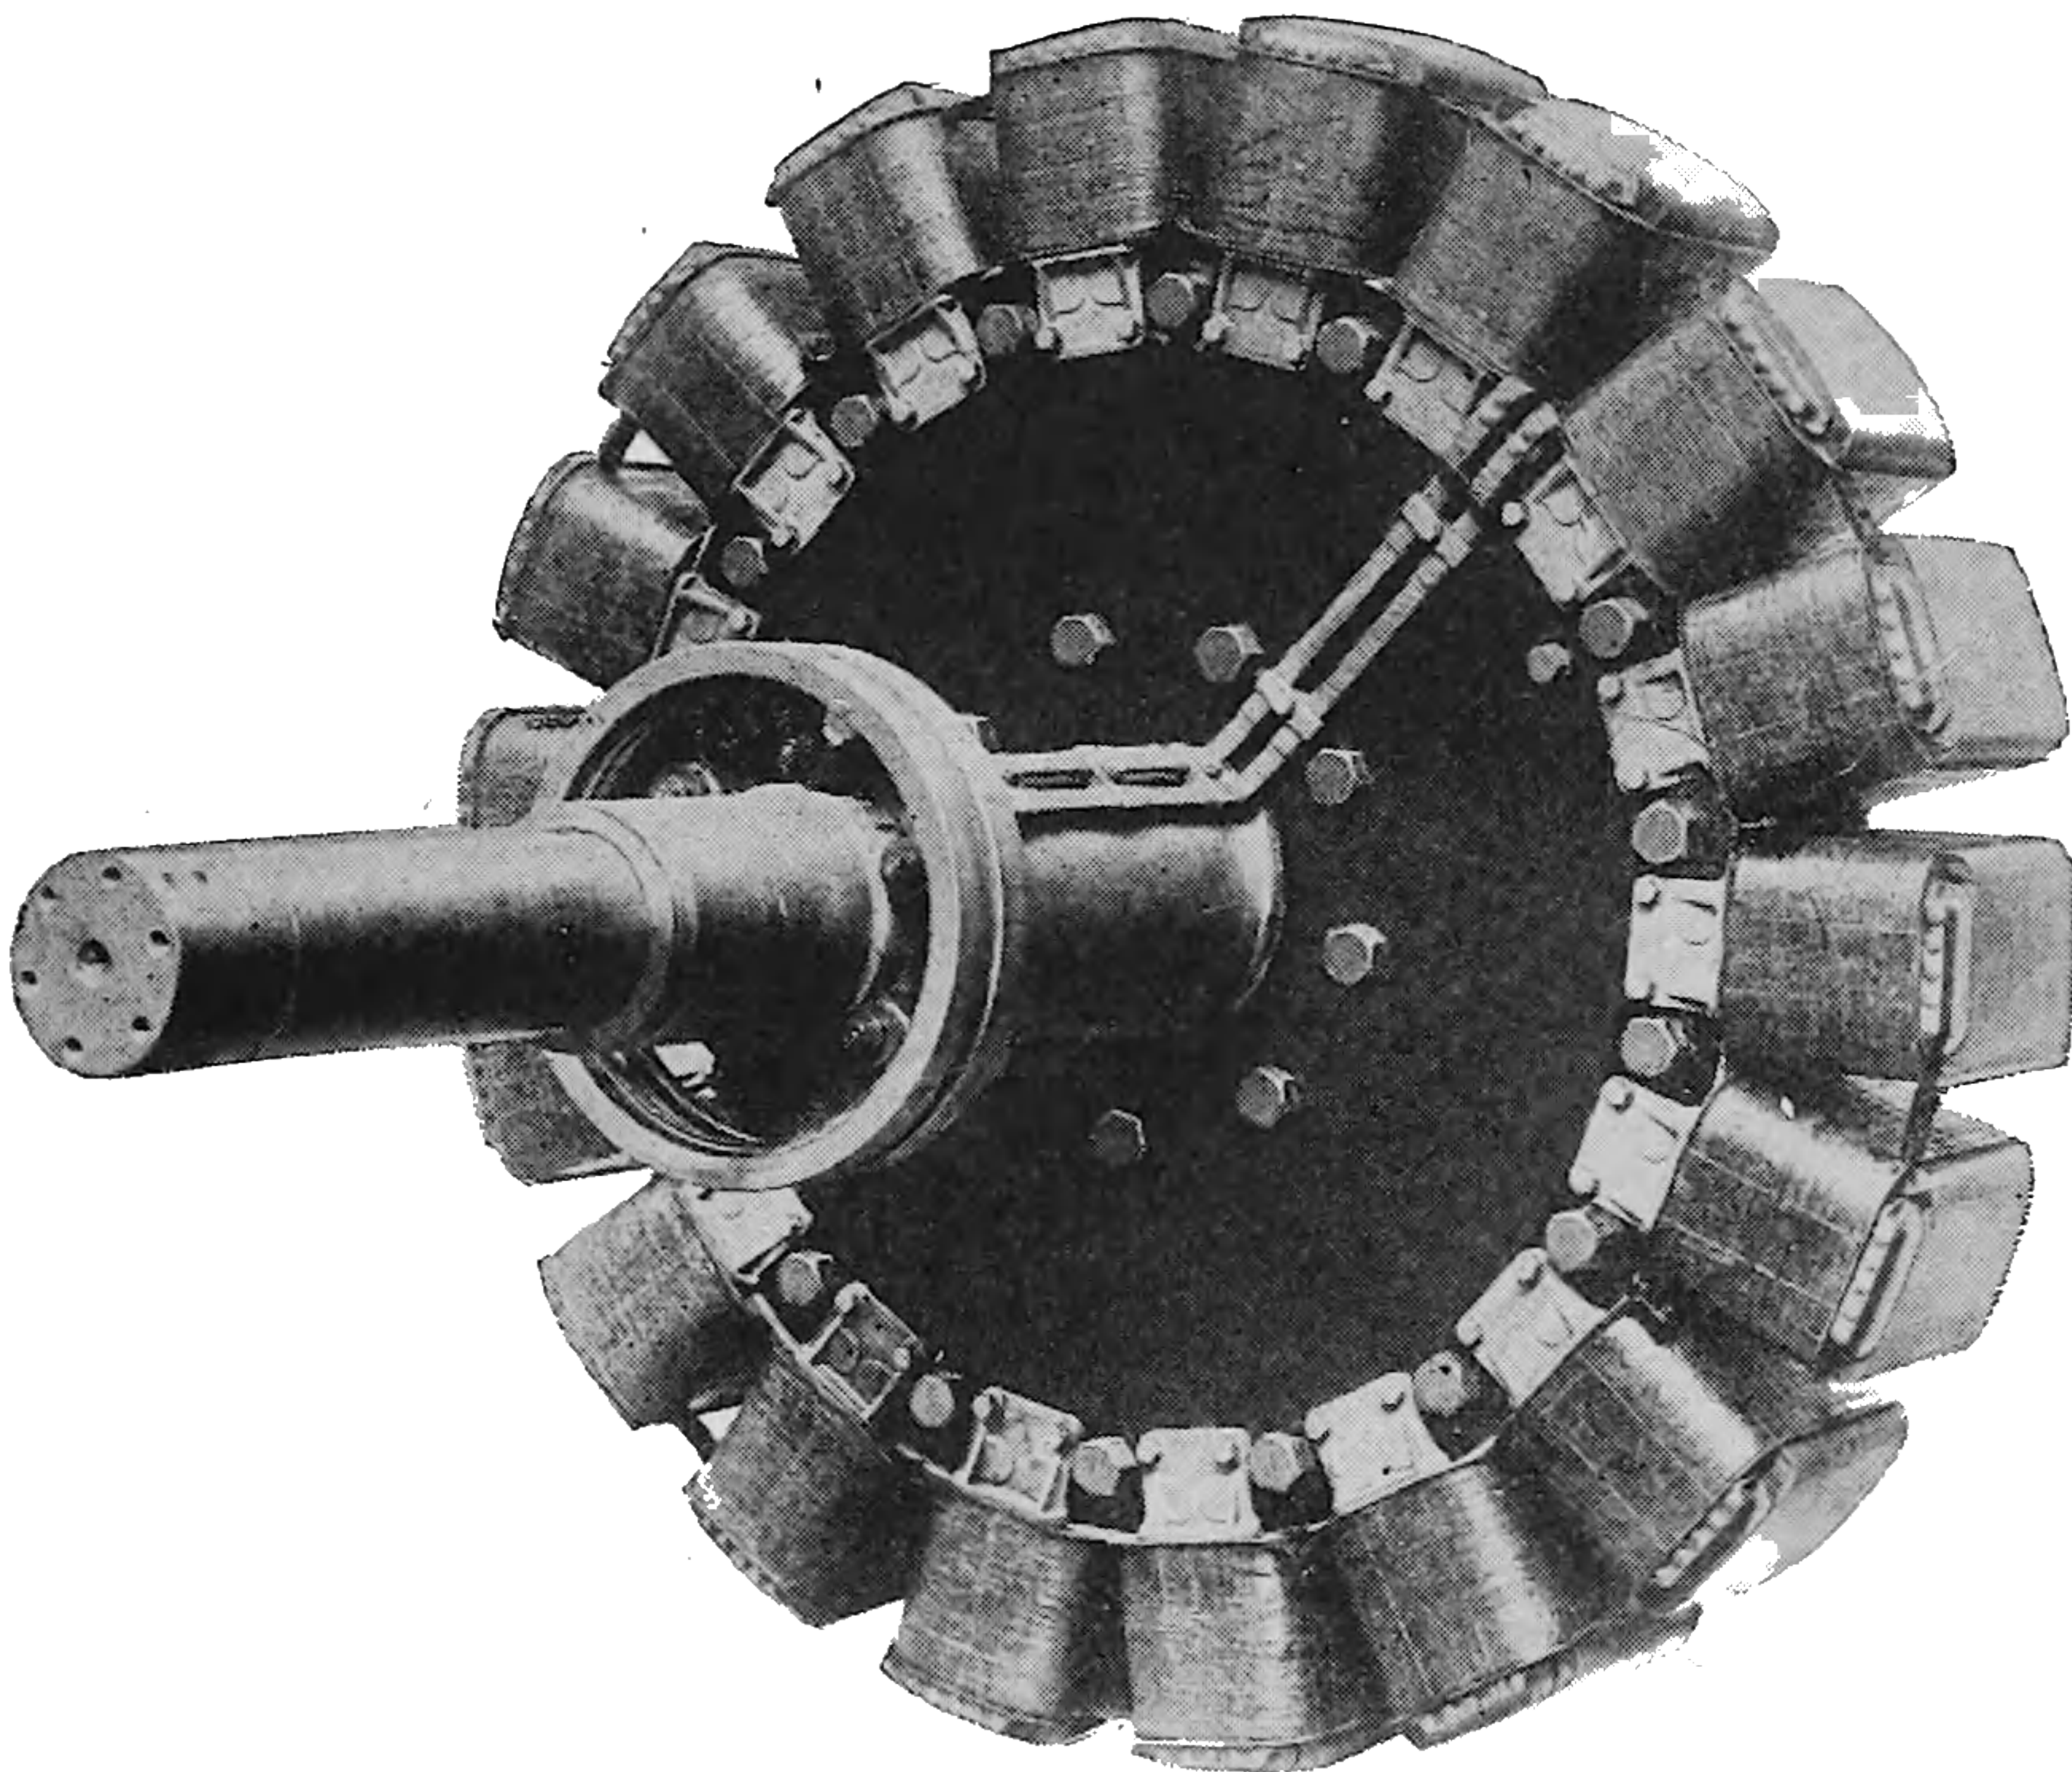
Westinghouse Rotor Construction Showing Rolled-Steel Plate Spider and Dovetailed Pole Pieces in Position
